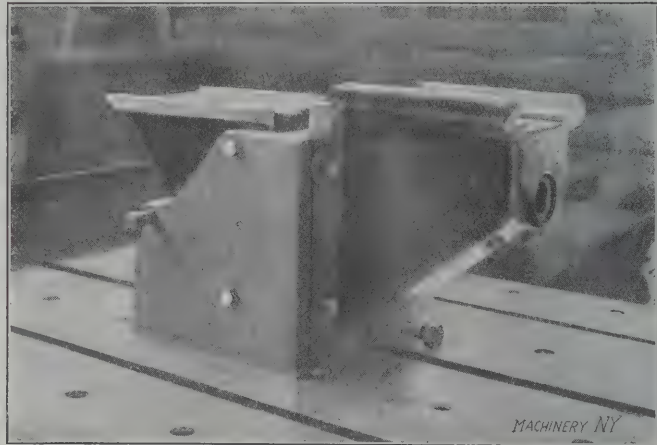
Combination Fixture for Holding Grinder Knees while planing Male and Female Dove-tail Slides
